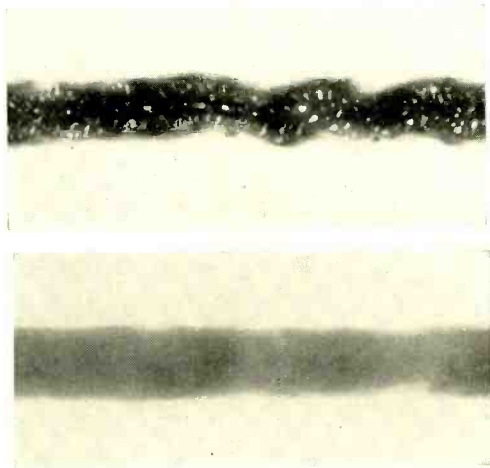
Of two welded butt joints, X-rays revealed inclusions of gas in one (above) and no such defects in the other (below)
